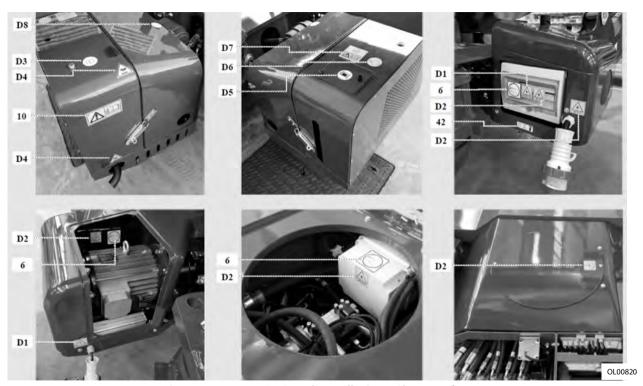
X33JP - Decal Installation - Sheet 8 of 10
